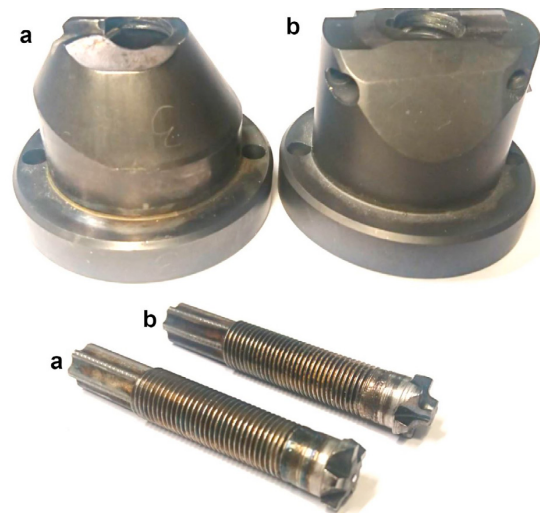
Photograph of the tool parts used to build the layered structure; (a) pin and stationary housing used for stringer bead deposition; (b) pin and stationary housing used to fill the groove between the stringer beads.
